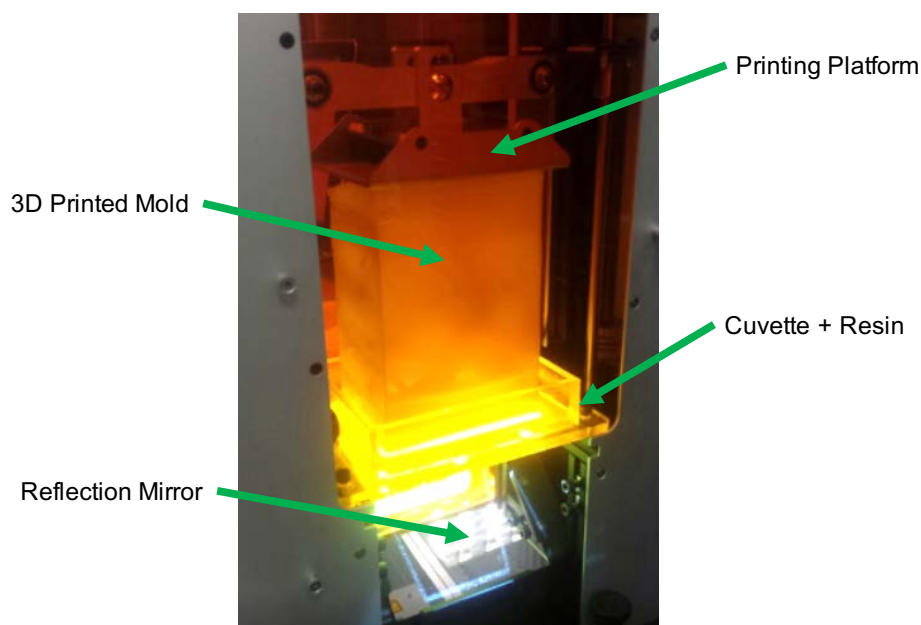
Image of the mold's printing process with a stereolithography printer.
